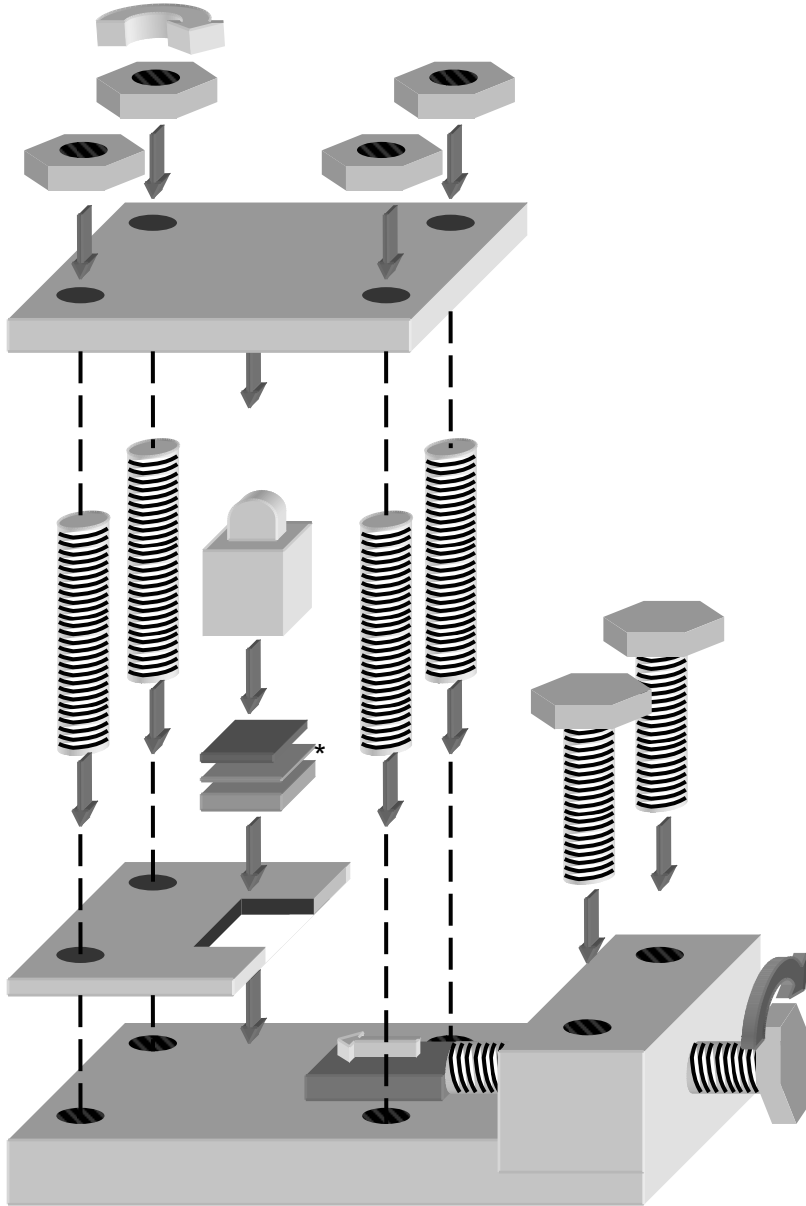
Exploded schematic view of the graphite nonplanar pressure block nonplanar wafer bonding fixture. Rotating the screw on the lower right pinches the samples (*) from the side and aligns their edges.
